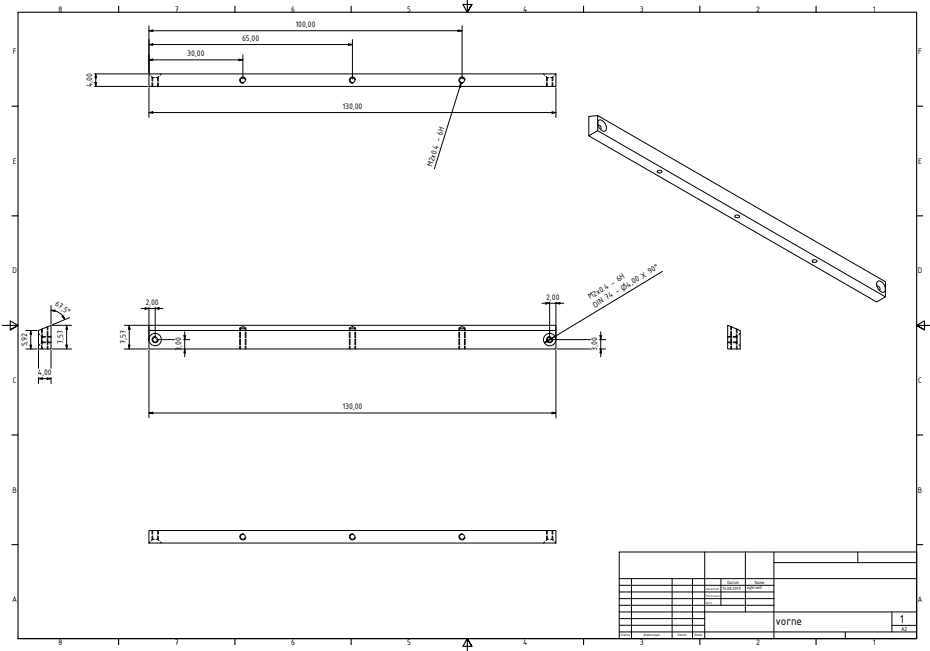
Technical drawing of the front plate of a box from the back part of the pair spectrometer.
